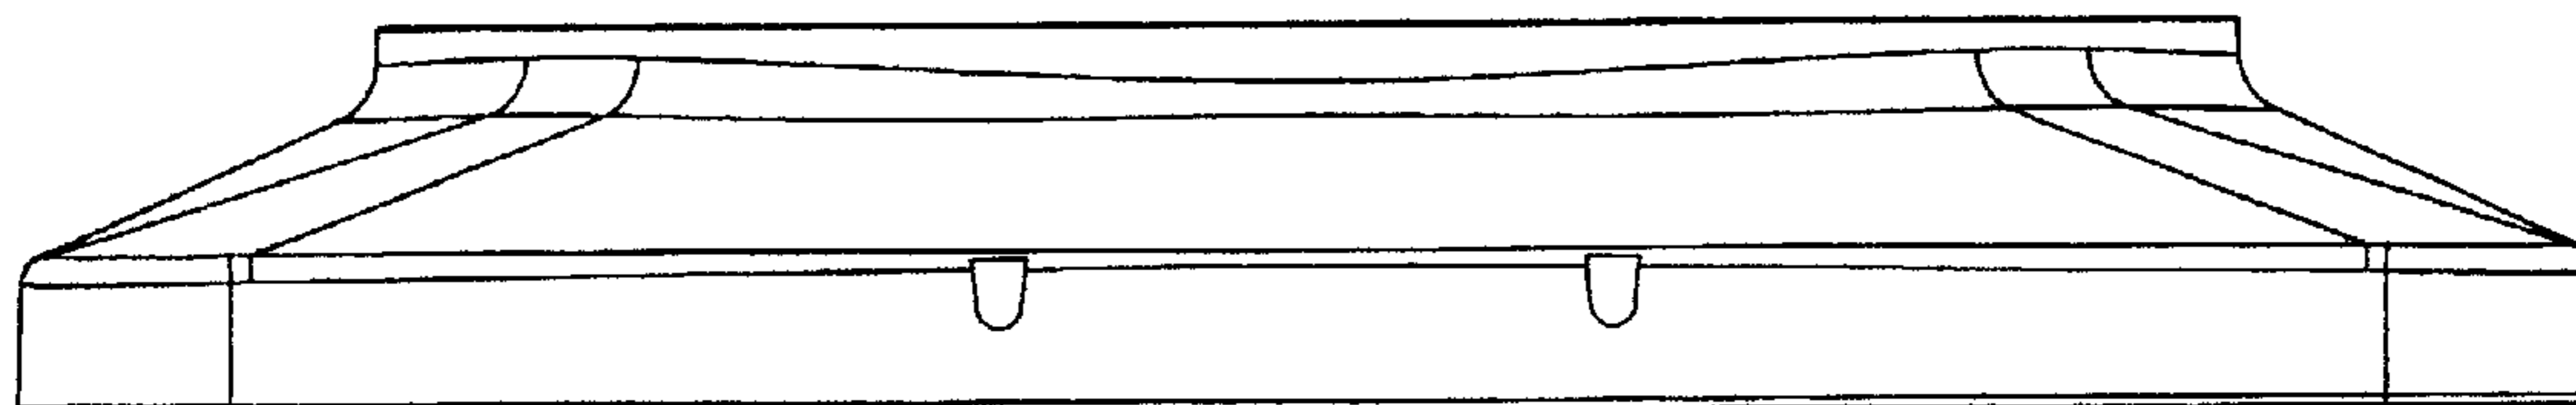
is a bottom view of the combined fan assembly and shroud portion shown separately for clarity of illustration.
